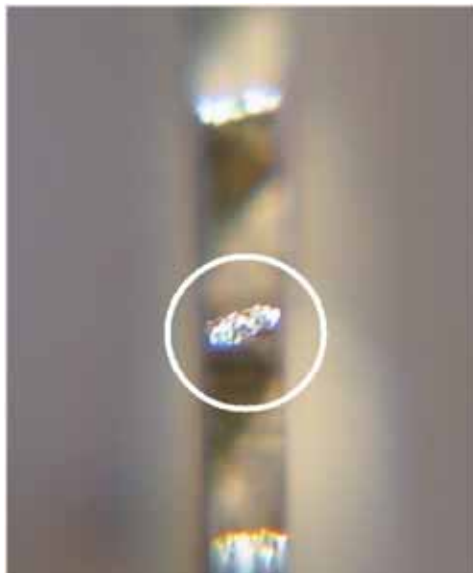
A twisted tooth tip. This is probably due to faulty technique during the drawing process. Following tipping, these twisted teeth should be straightened.
